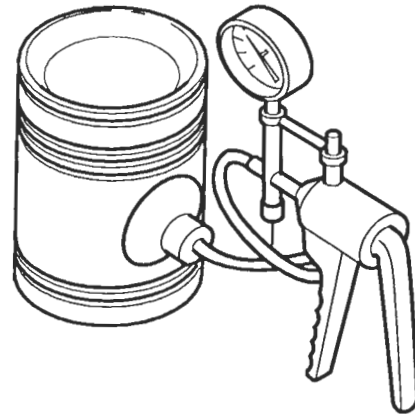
Checking Piston Pin Retainer for Proper Sealing
